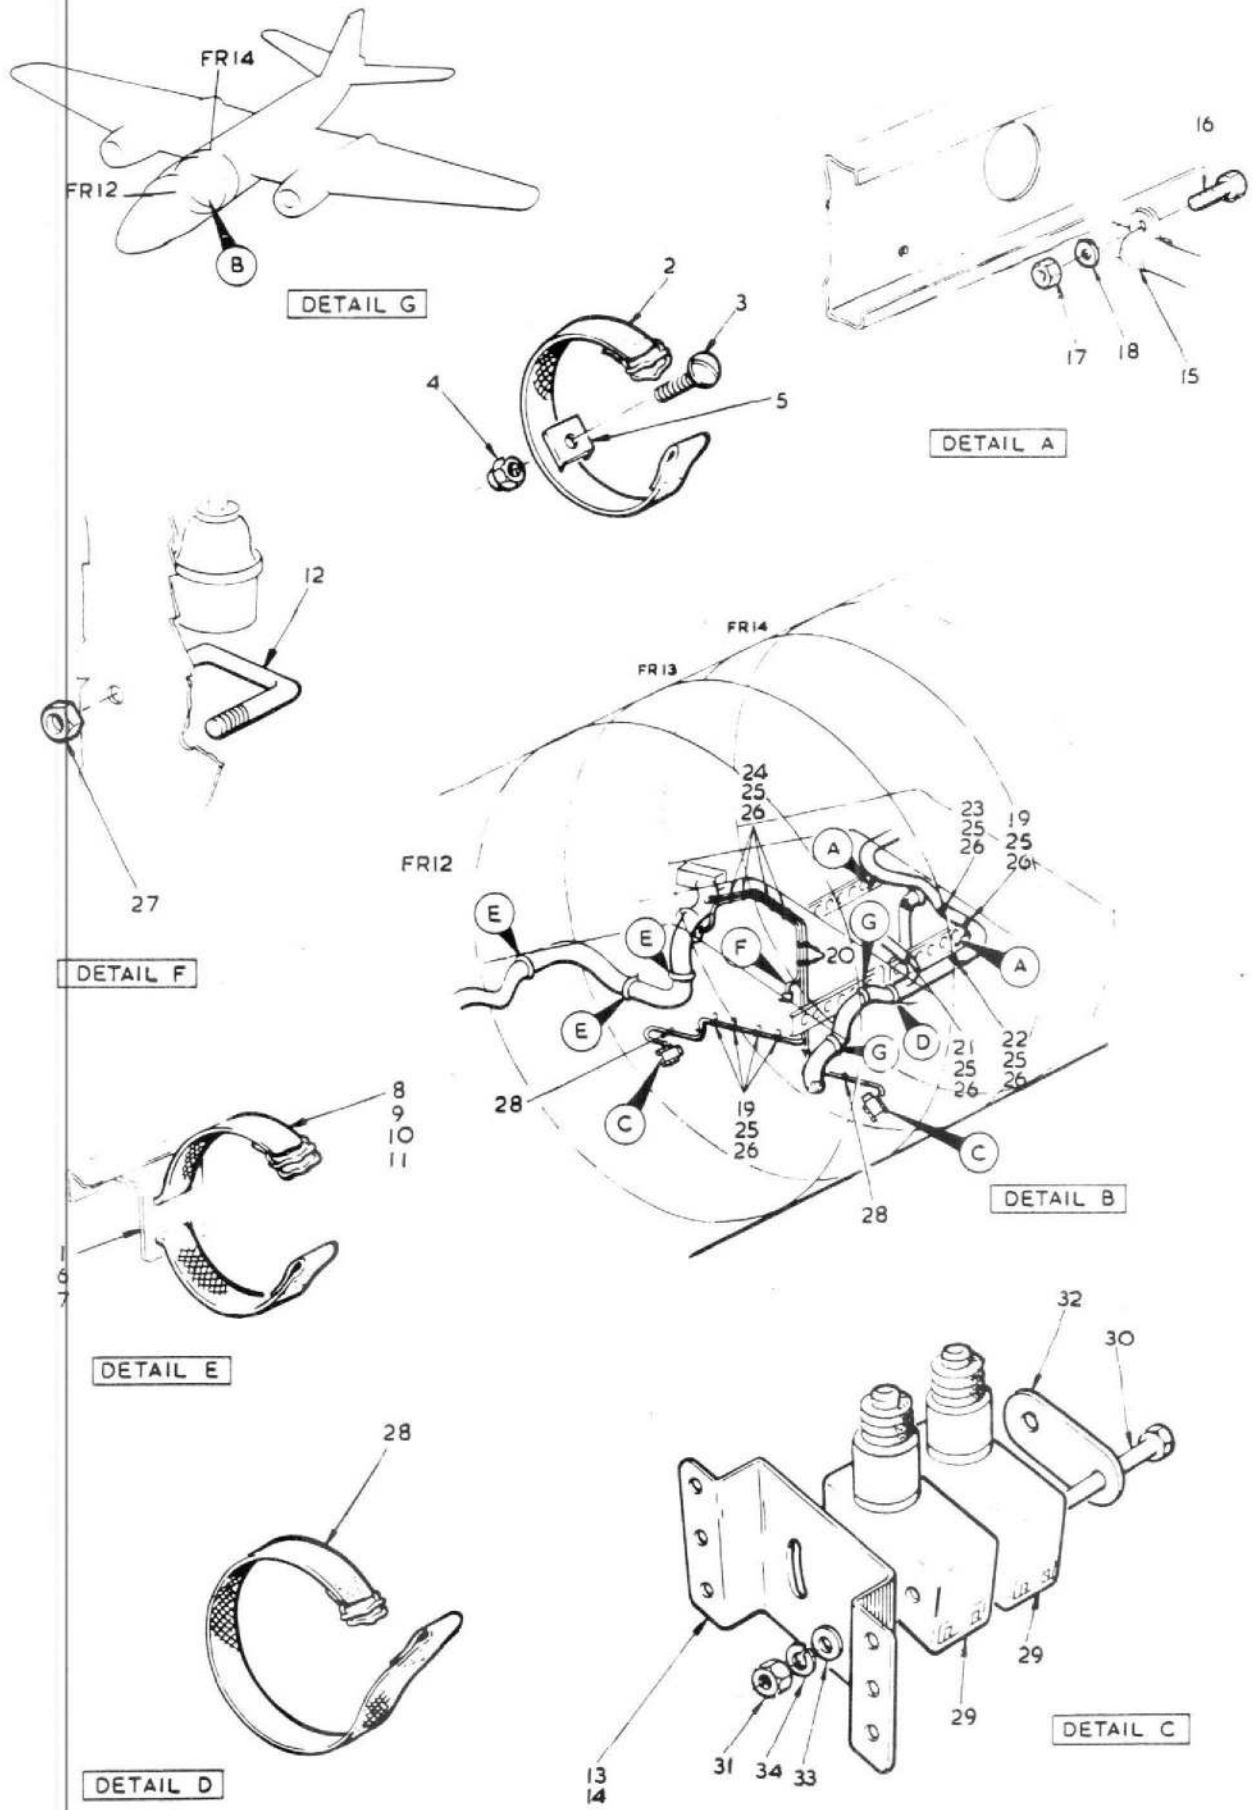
ELECTRICAL EQUIPMENT IN CENTRE SECTION
